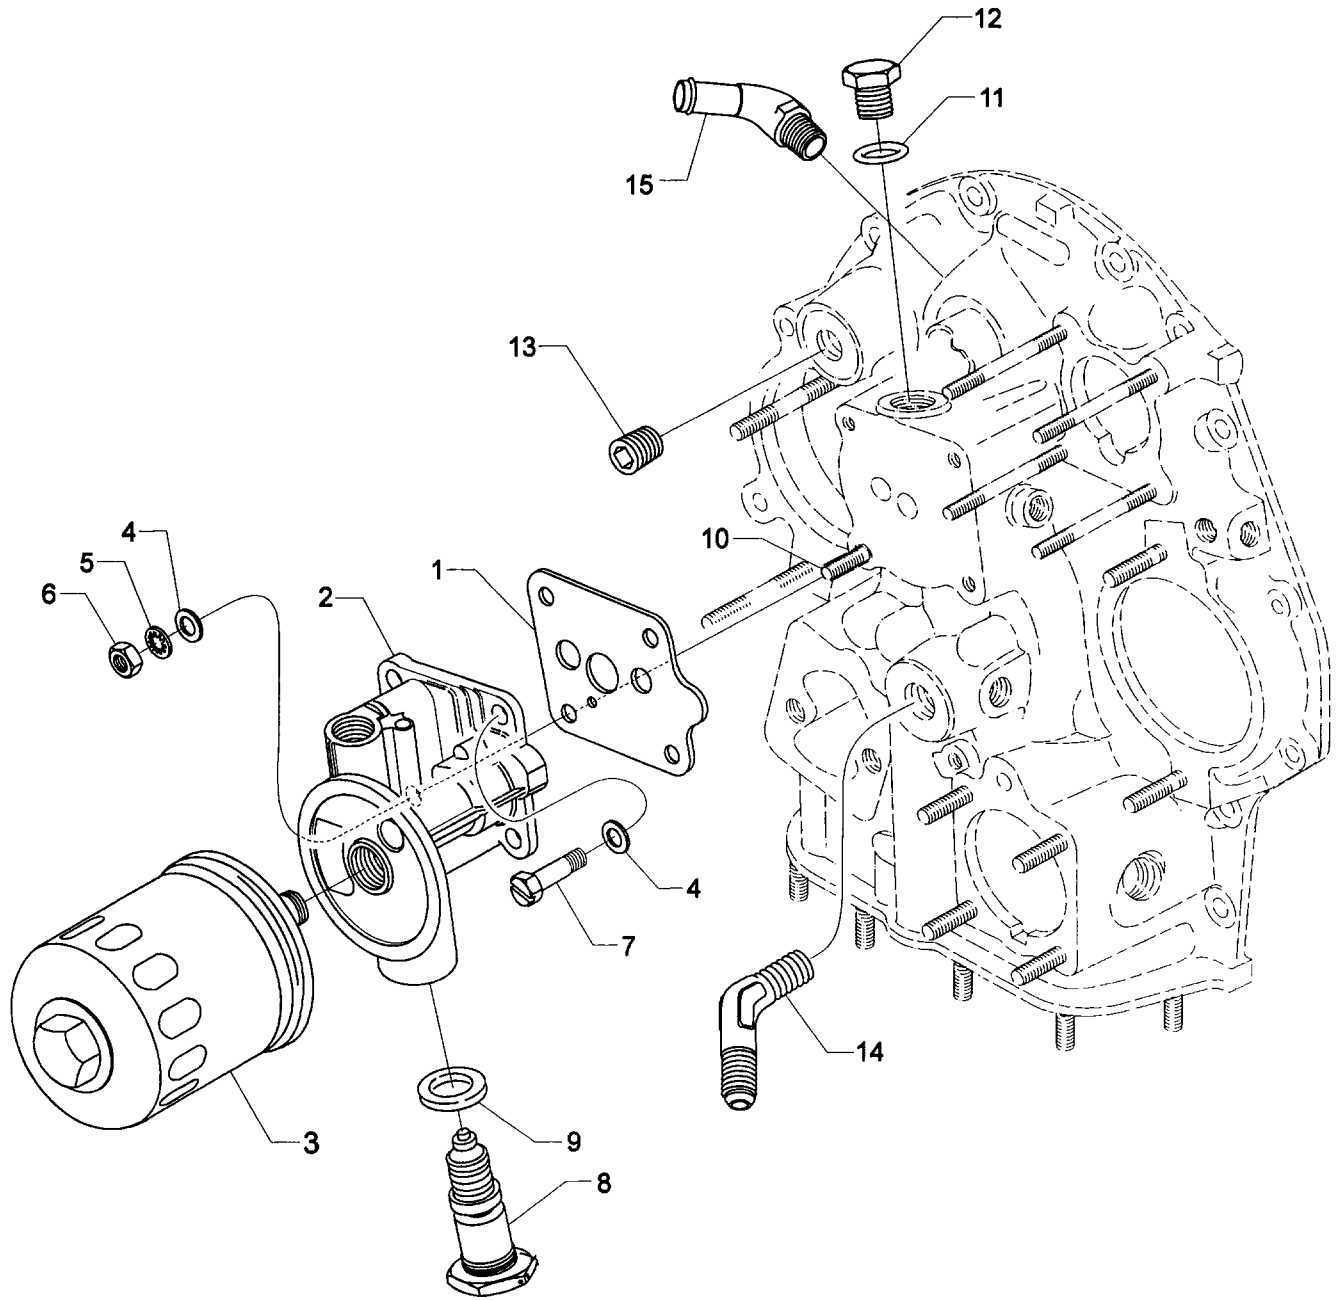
OIL FILTER ASSEMBLY, OIL COOLER BYPASS VALVE AND FITTINGS
